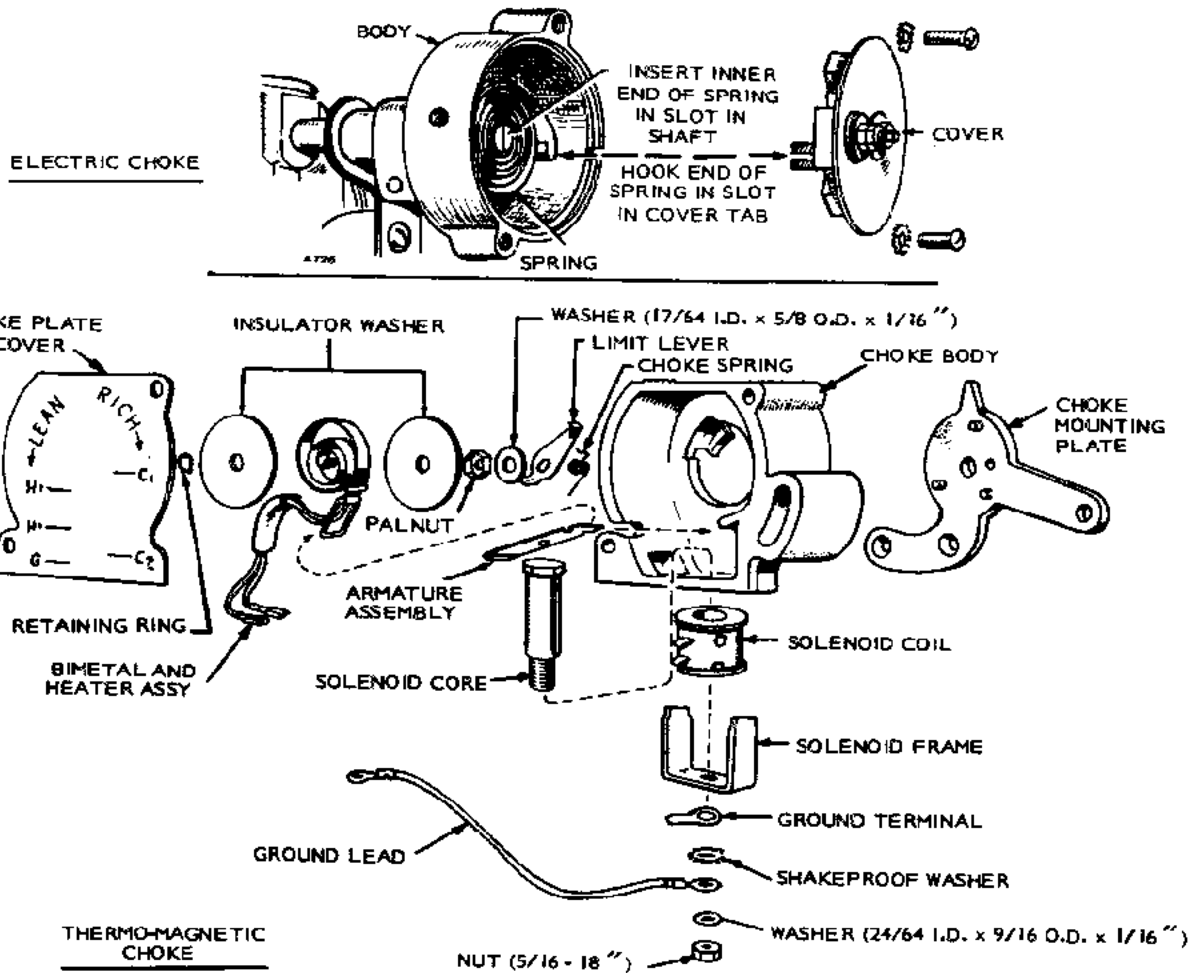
DISASSEMBLY OF ELECTRIC AND THERMO-ELECTRIC CHOKE
